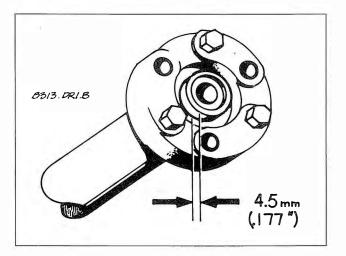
When installing new driveshaft centering guide, check protrusion of guide as shown.
